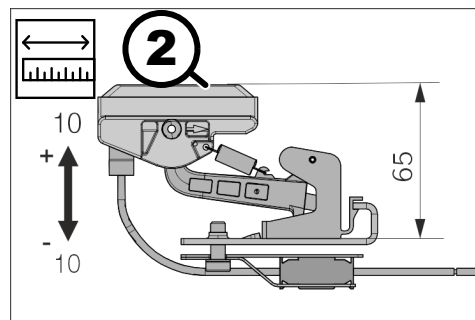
Check the installation dimensions of the single current collector and the contact force. The working stroke must not be exceeded or fall short.
